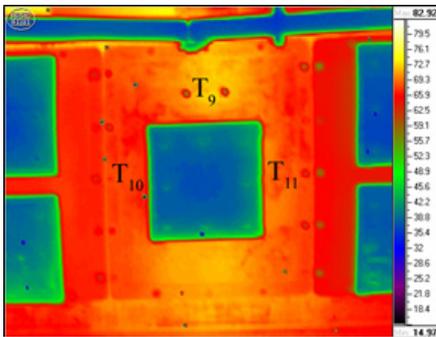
Housing Assembly fragment in the Connecting-Rod Gear area (5 units per plant)
